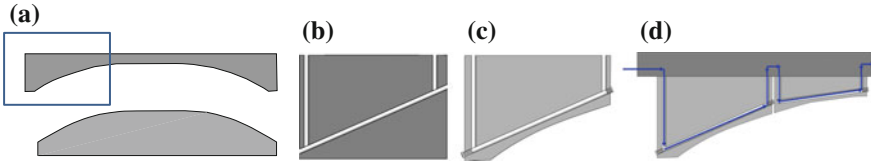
A bumper beam tool manufacturing: a General outlook of a bumper beam tool, b deep drilling of cooling channels, c sealing of channels and machining of die surface, d coolant flow in the assembly
